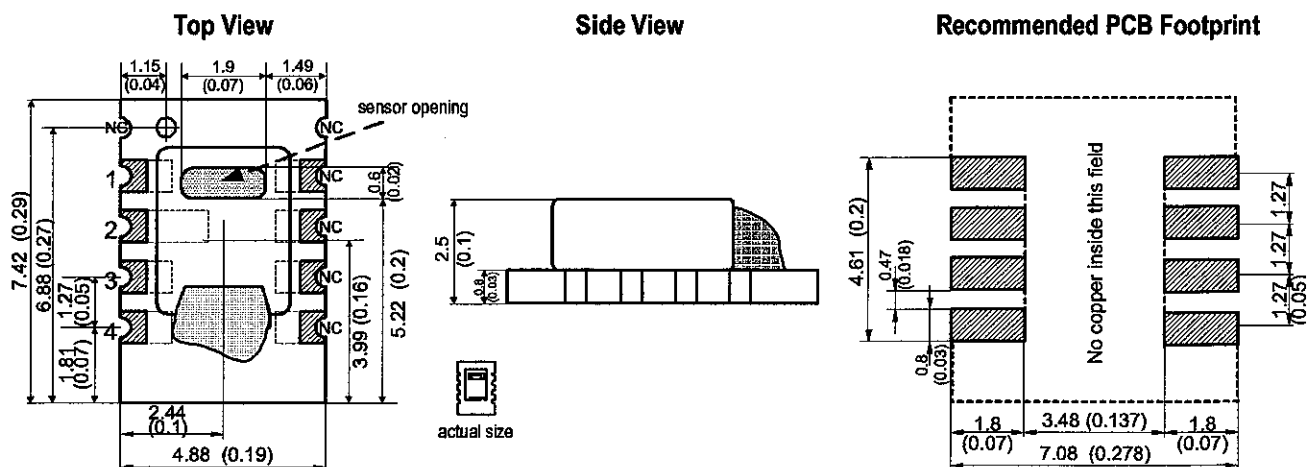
SHT1x drawing and footprint dimensions in mm (inch)
